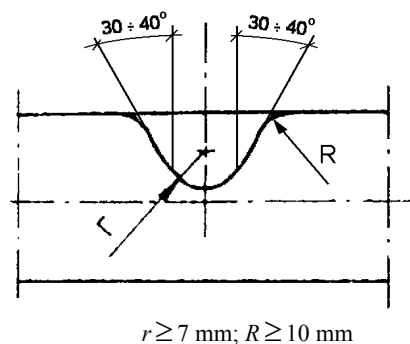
Welding groove after cutting out defects
